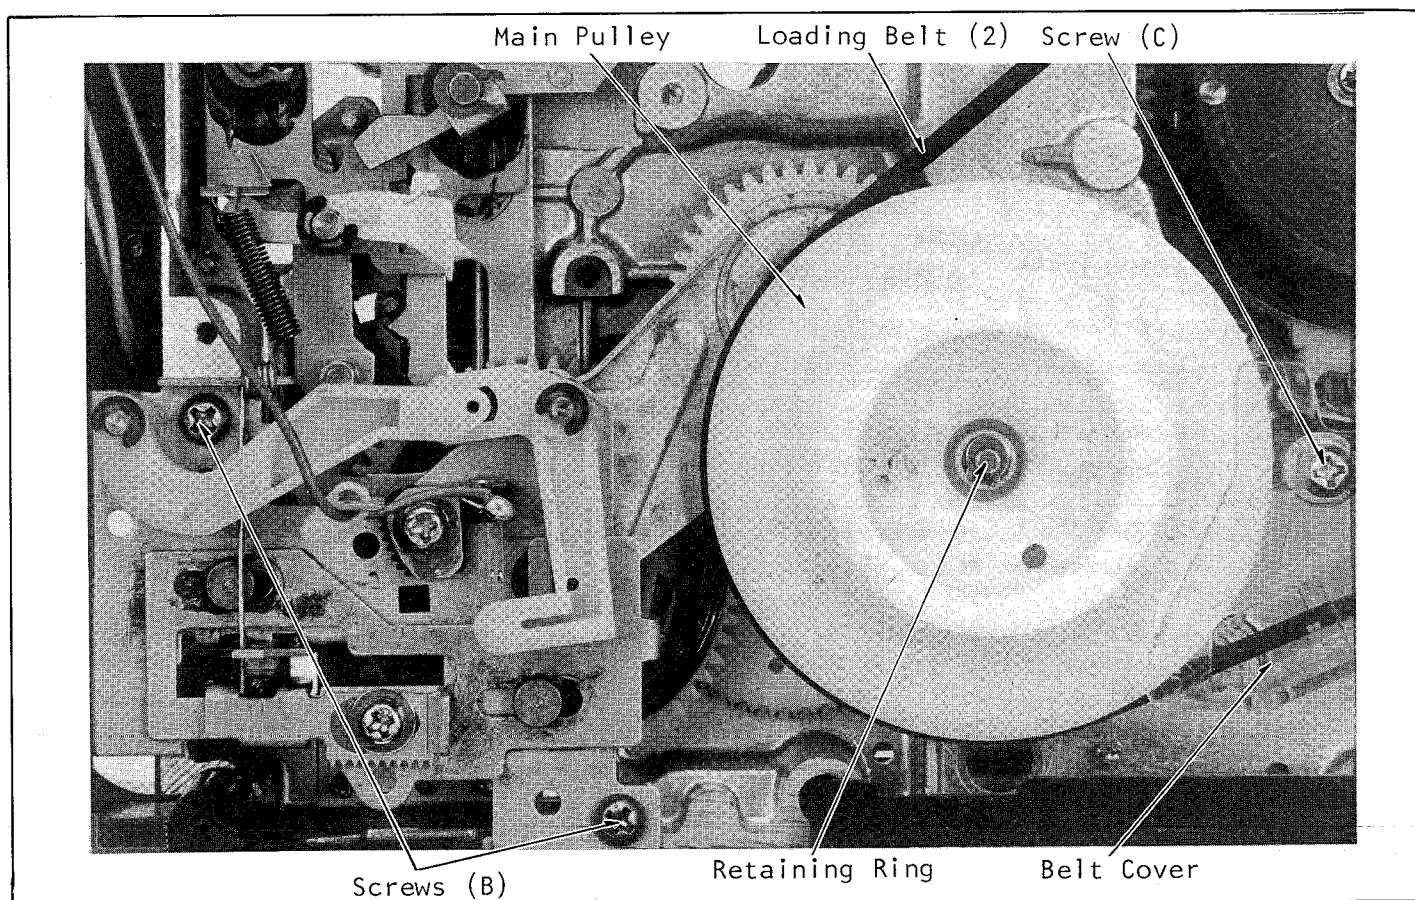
Adjustment of Cam Gear and Mode Select Switch - (9)
